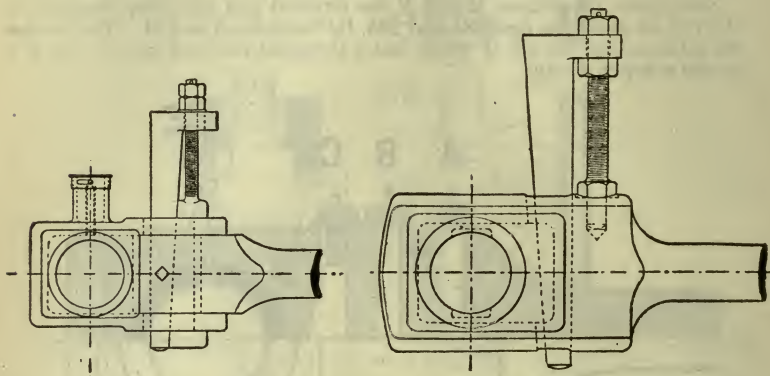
and 285.—Built up connecting rod cotters. The cross bolts A and B secure the strap to the stub end of the rod. The gib G is adjusted at the stud end C. A wiper oil cup for a horizontal rod is shown at E.
